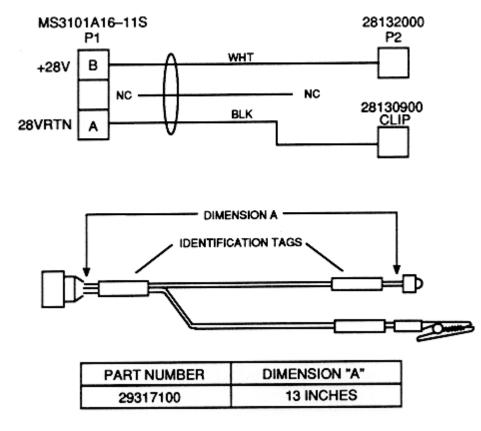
DC Power Cable Adapter Assembly (PN 29317100)
